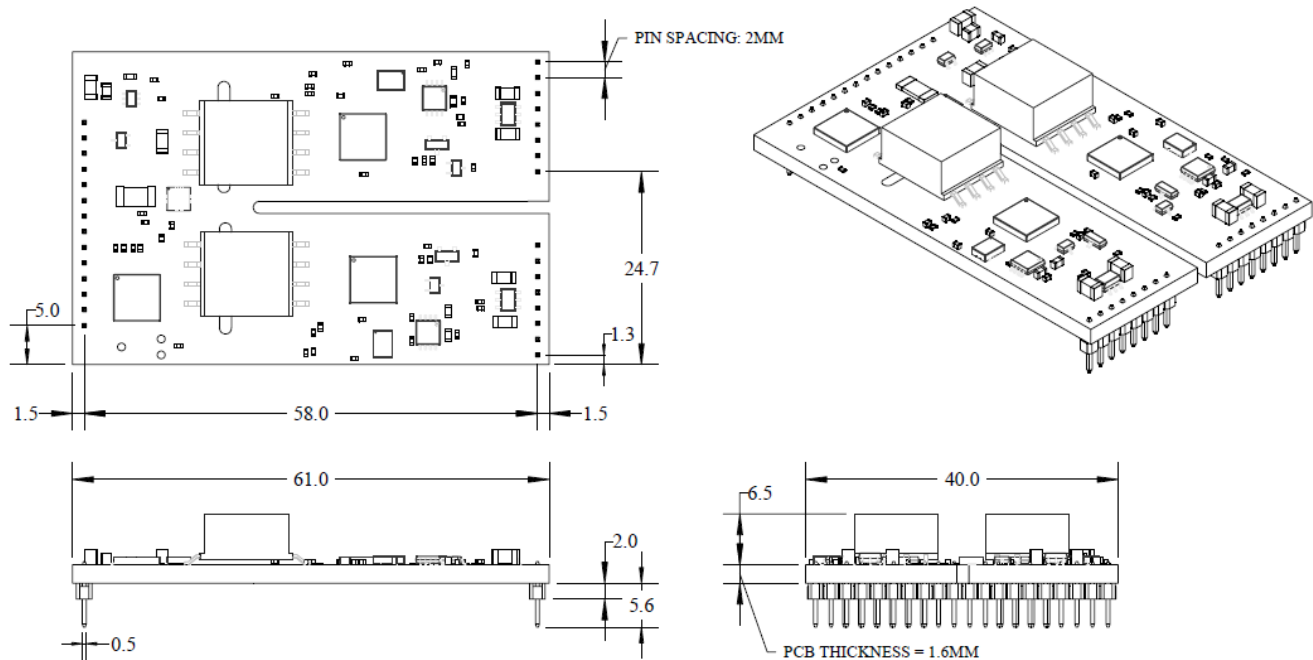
Dimensions of the 2ASC-12A1HP Core (+/- 0.1mm)
